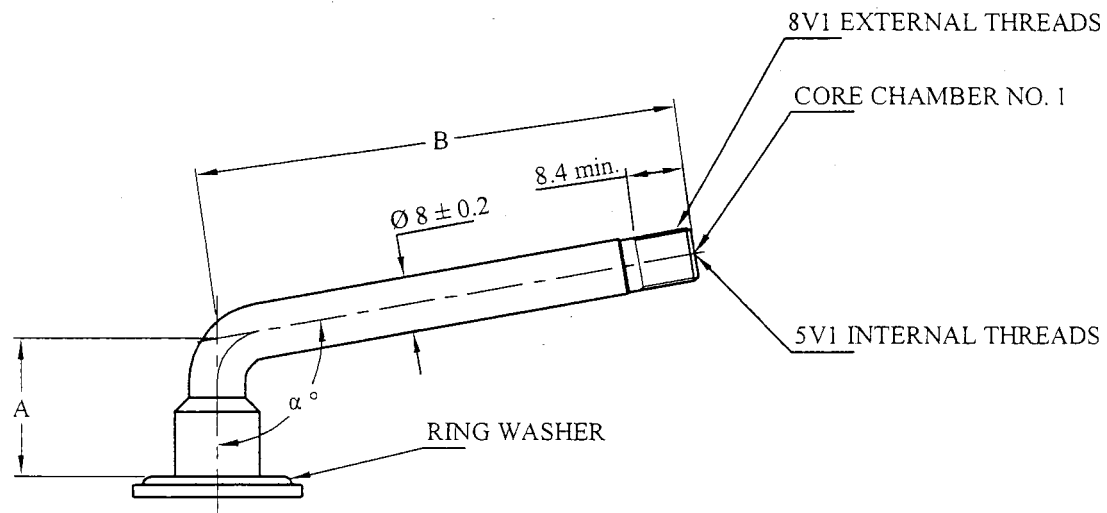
SCREW-ON UNIVERSAL TUBE VALVE HEAD SHAPE TRUCK AND BUS VALVE
